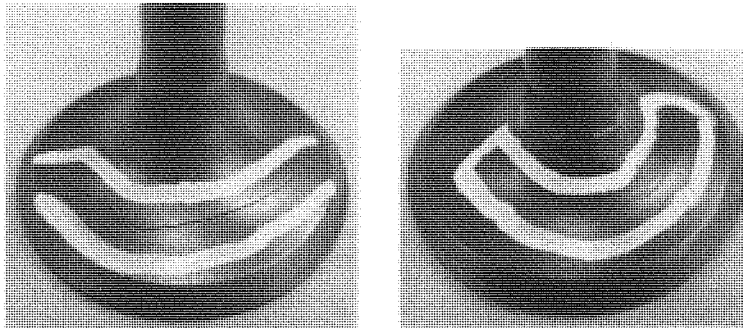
Cracked Valves from E15 Verado 1B812776, Bottom Valve in Cyl. 3 Left, and Top Valve in Cyl. 6 Right
